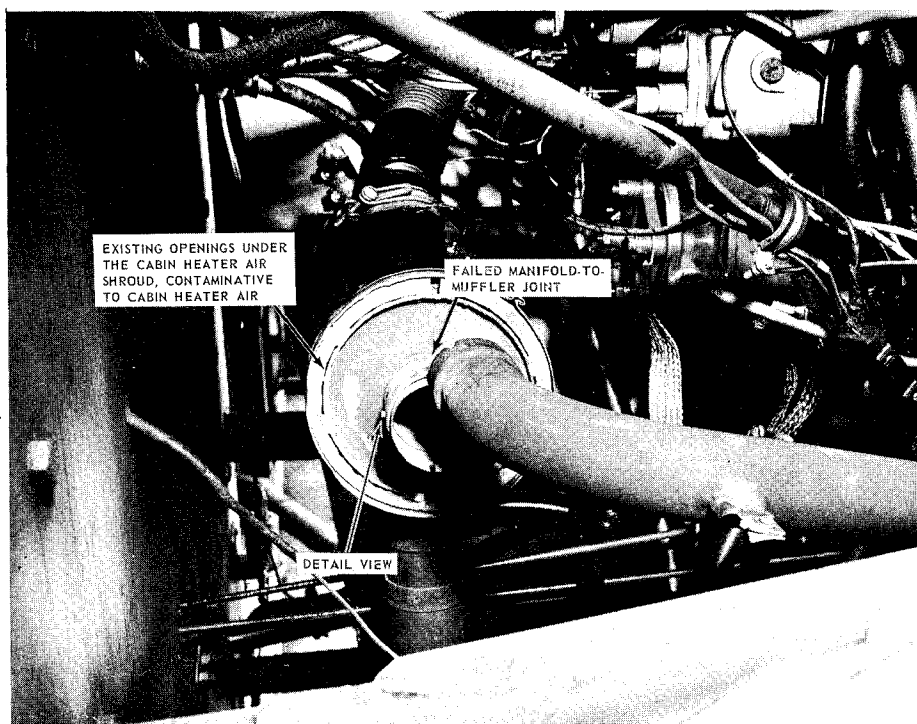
FAILED MANIFOLD-TO-MUFFLER JOINT
